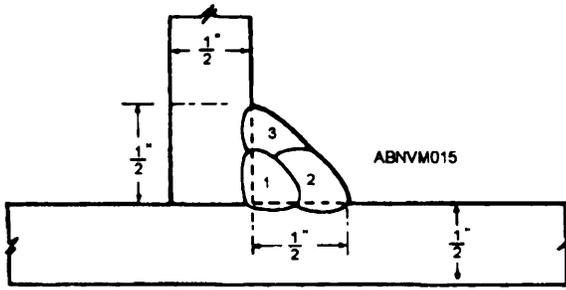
Order of making stringer beads for a T-joint in heavy plate.
